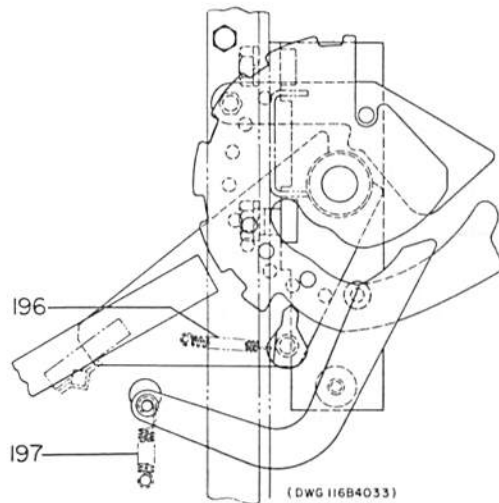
Drawout racking mechanism, (Ref. No. 195)
